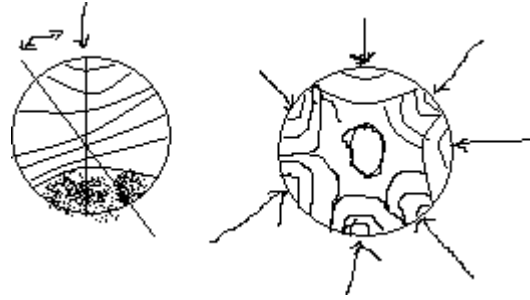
Typical fatigue marks on the fractured surface of a uniformly loaded rotating shaft having subjected to moderate stress.
